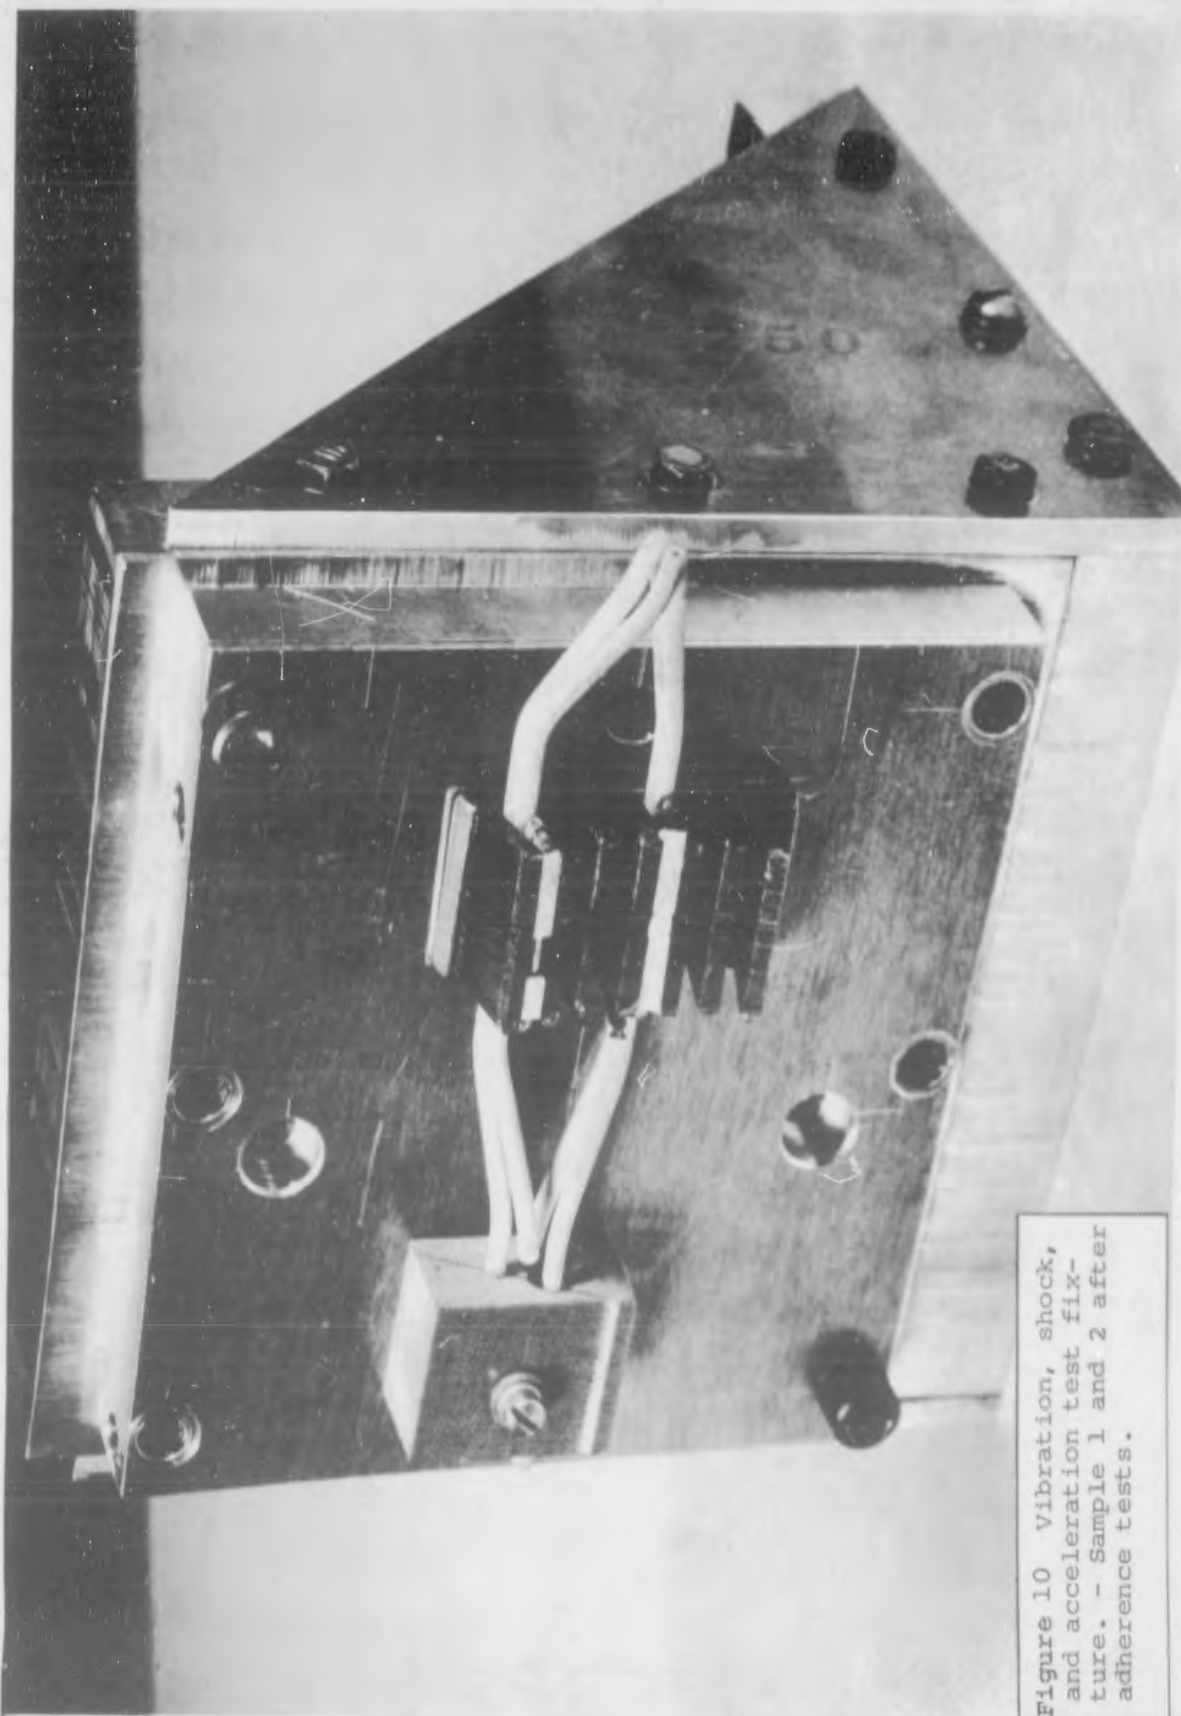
Vibration, shock, and acceleration test fixture. - Sample 1 and 2 after adherence tests.
